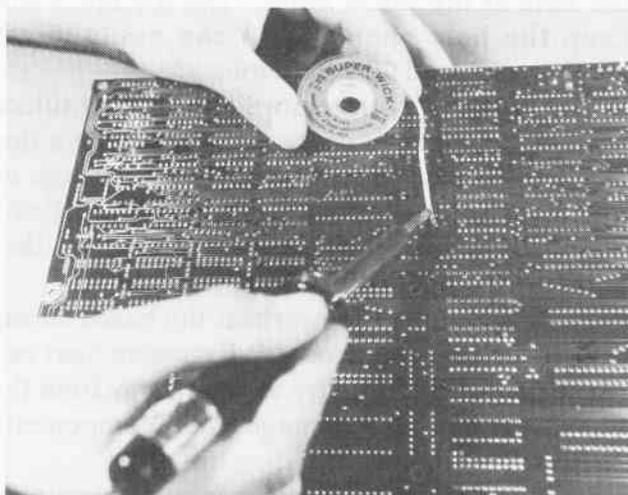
Solder can also be removed from a connection by using a solder wick to draw the solder up into the braid.
